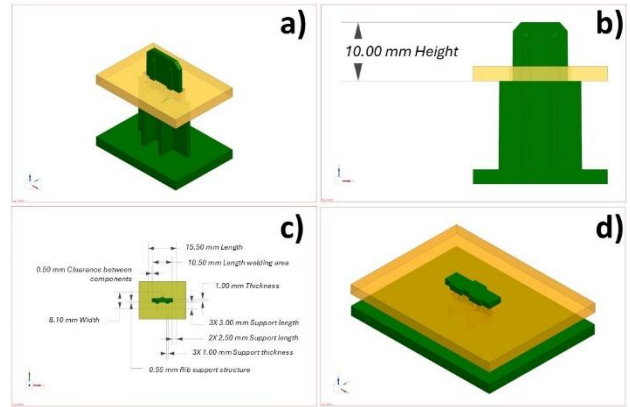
Proposed standardized geometry showing pre-welding and post-welding configurations
